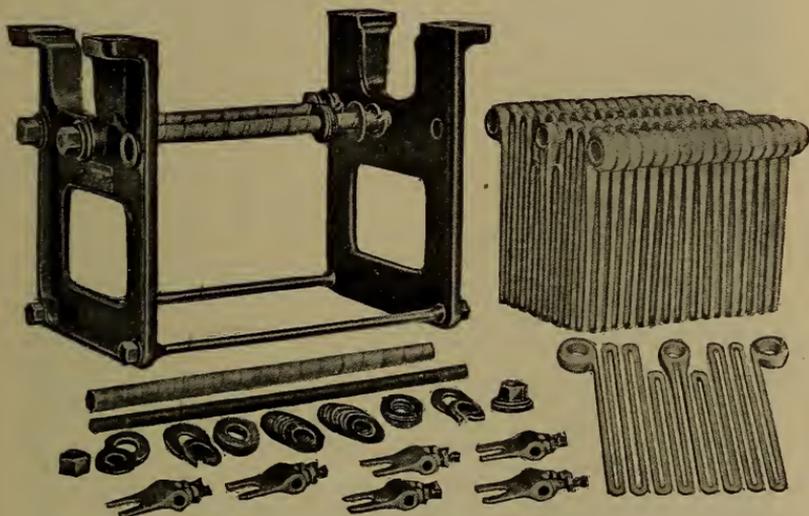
“CG” Rheostat. Disassembled View. Gen. Elec. Co.
